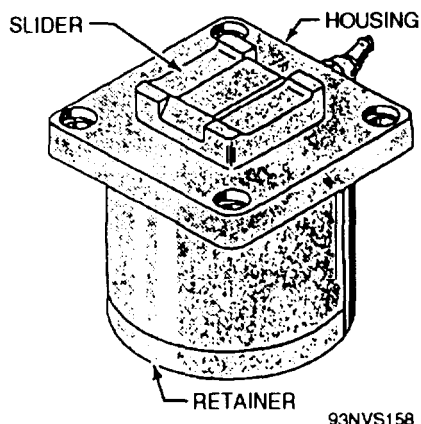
Nose-gear-launch actuator reset assembly.
